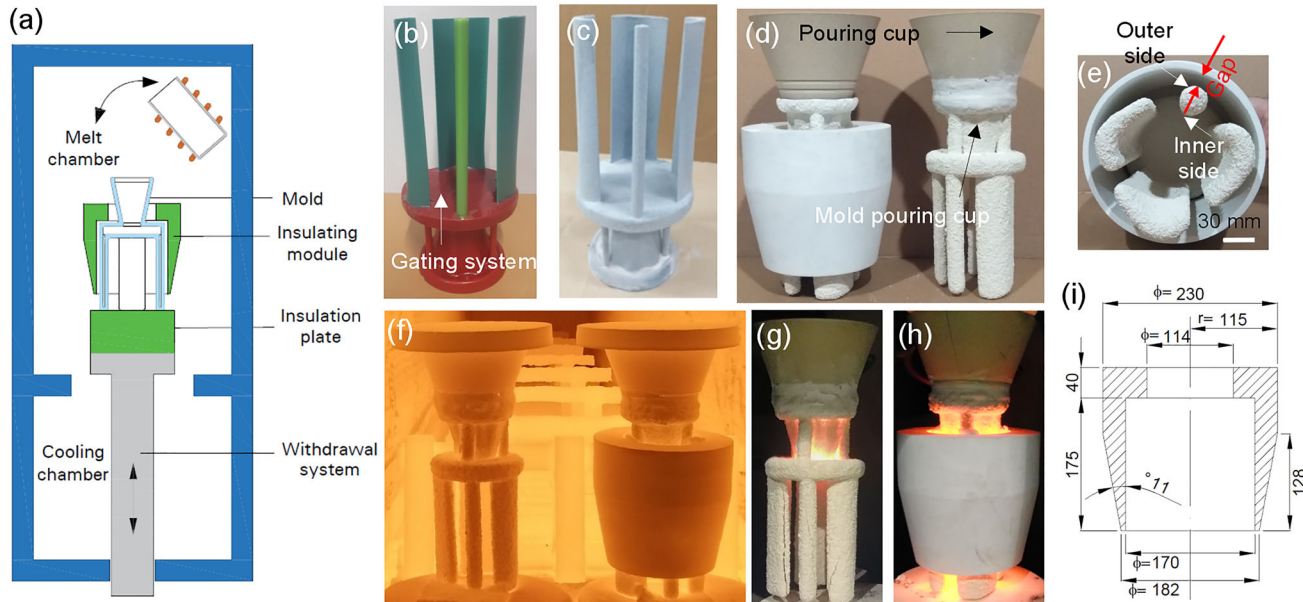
Schematic illustration of vacuum induction melting furnace with the mold placed inside the melting chamber (a), wax assembly without and with prime coat of mold (b and c), mold with and without applied insulating module used in the casting trials (d), view of the mold and insulating module showing the gap between them (e), the preheating of mold inside chamber furnace (f), the mold filled with molten metal during cooling inside the furnace (g, h), the shape and dimensions of the insulating module (i).
